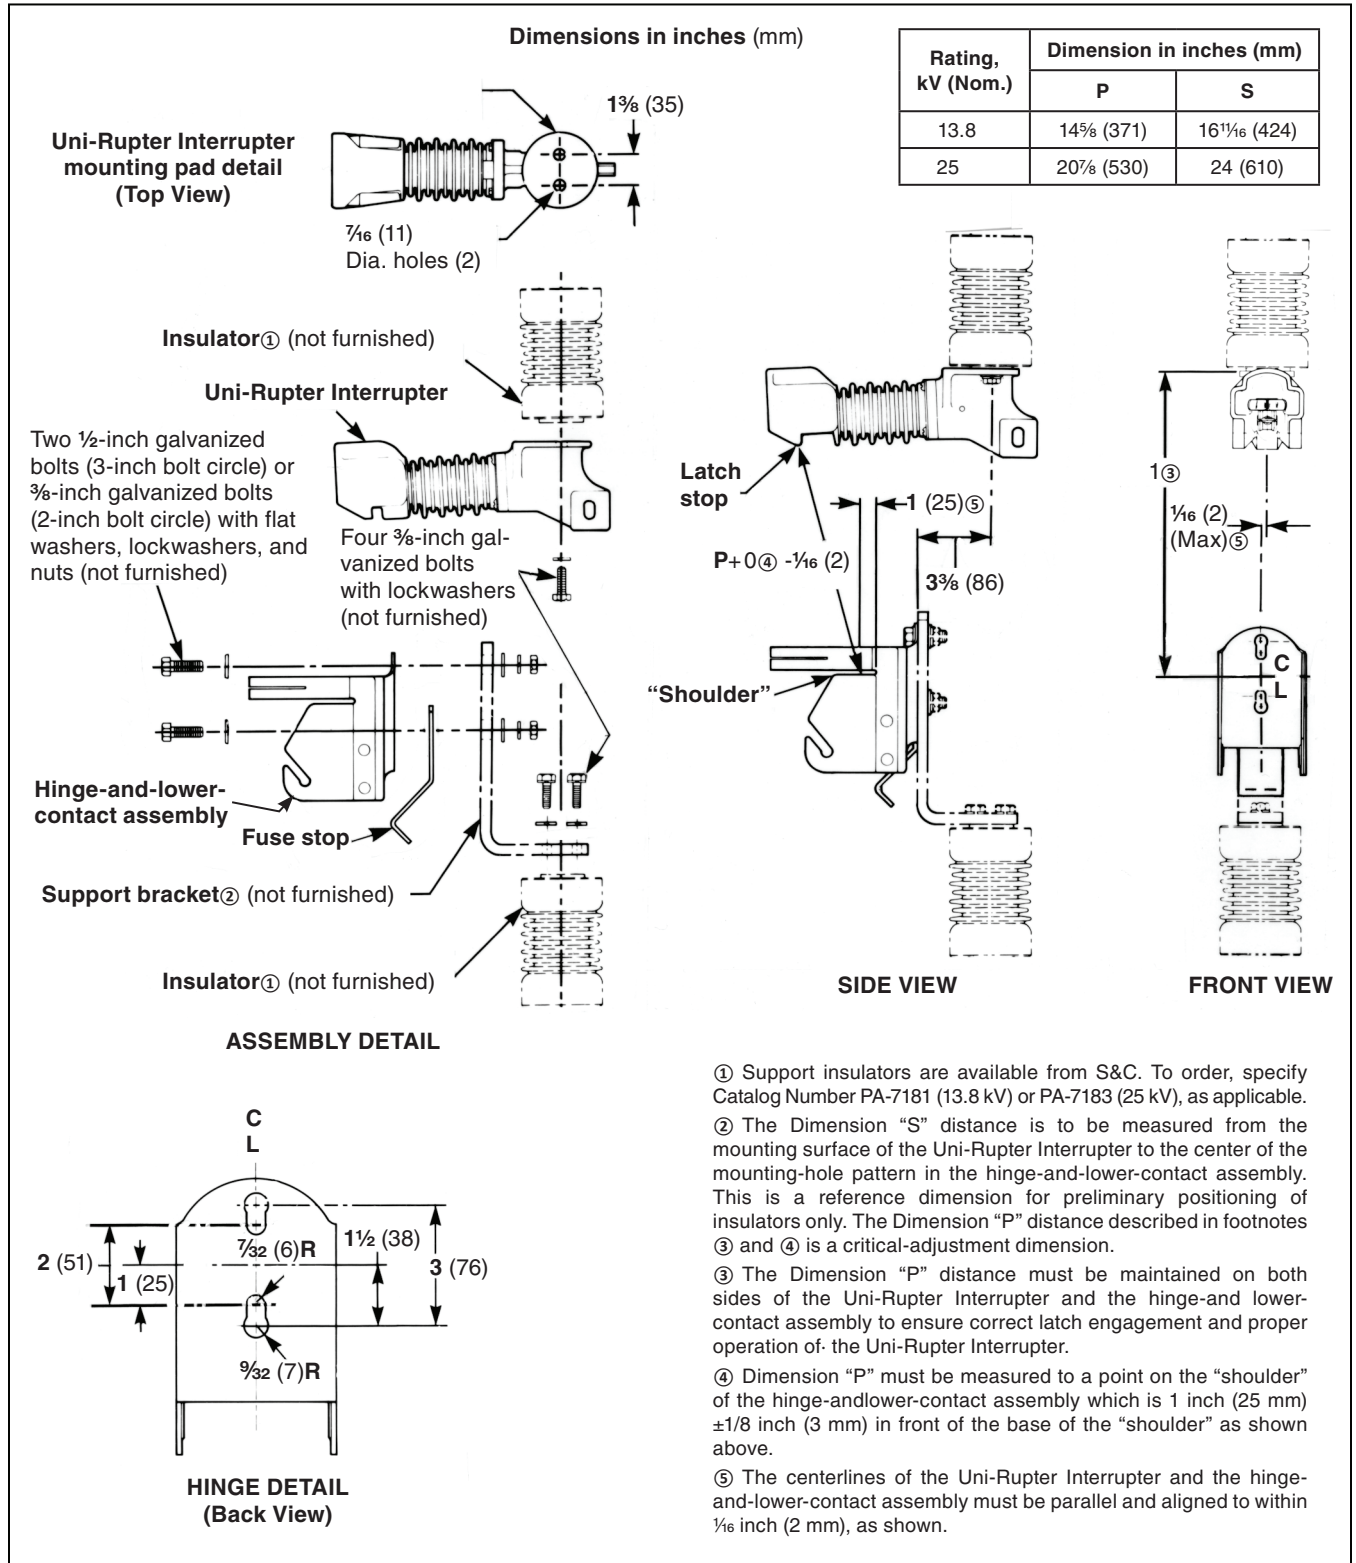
Mounting configuration using the bottom-supported hinge-and-lower-contact assembly.
